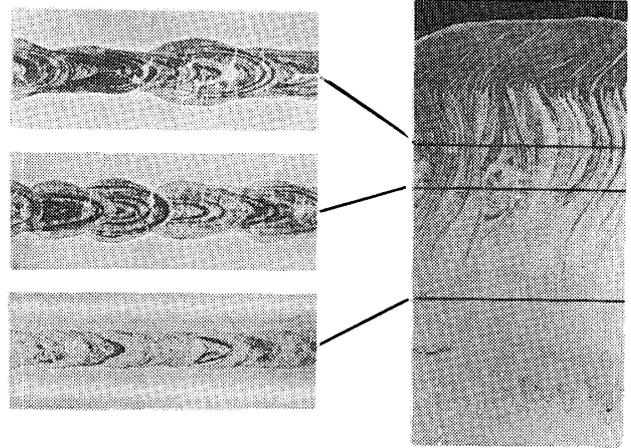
Horizontal sections of EB welds in case A type crack occurred
